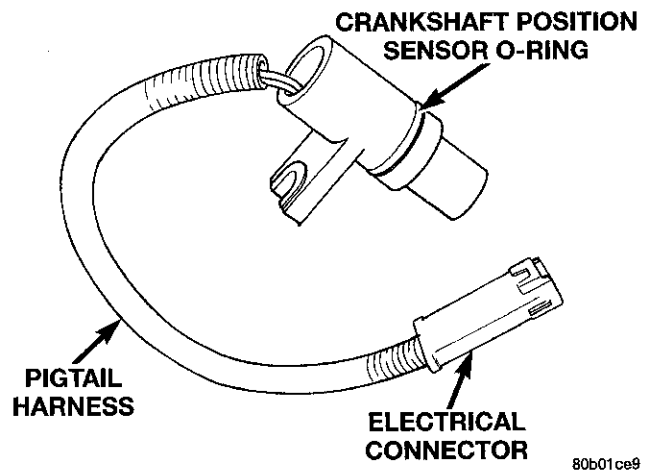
Sensor O-Ring—8.0L V-10 Engine
